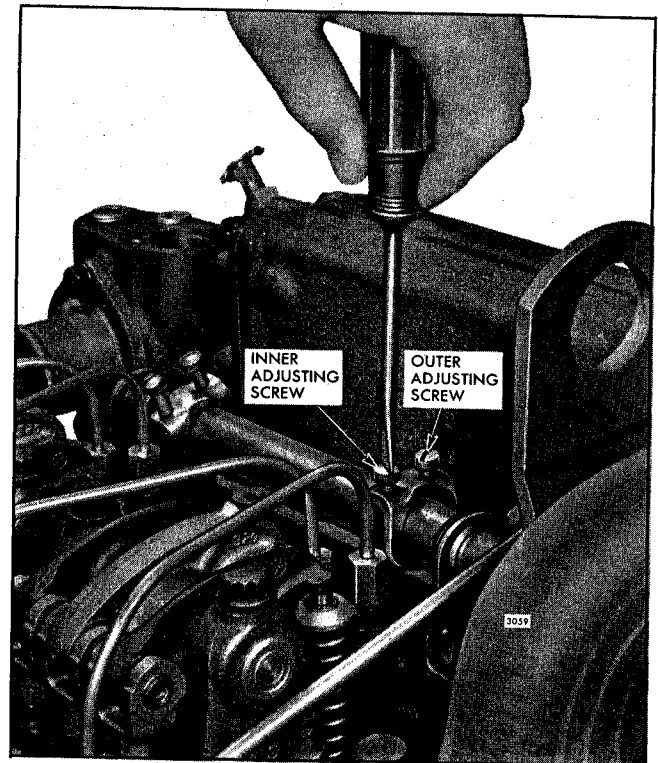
Adjusting Height of Rack Control Lever Adjusting Screws
